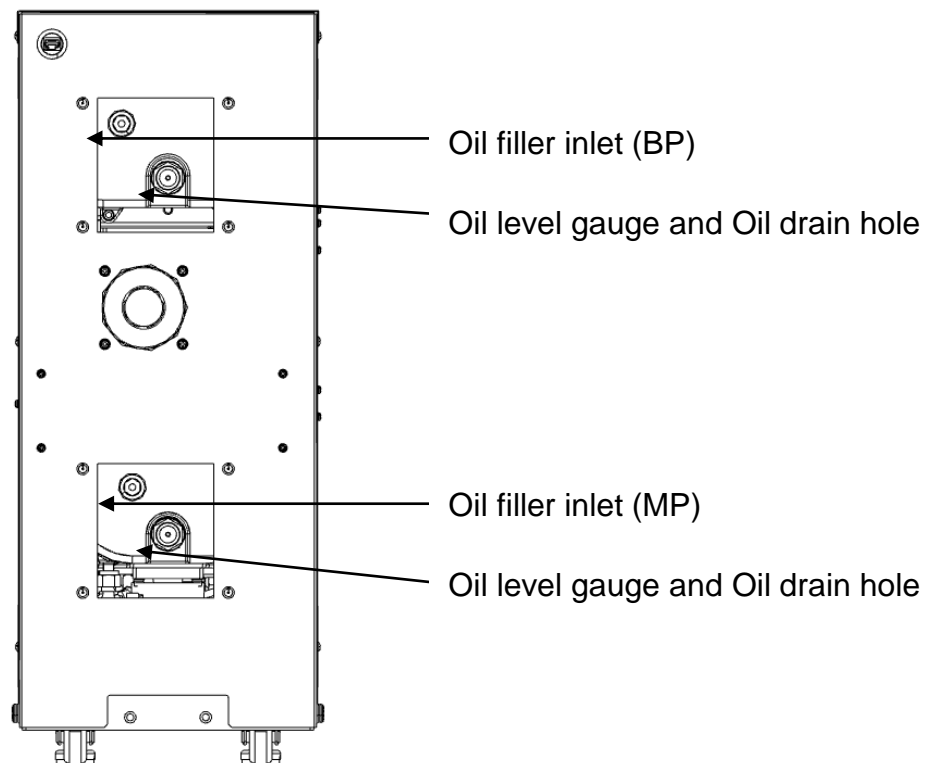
Oil filler port, oil level gauge, and oil drain port positions
